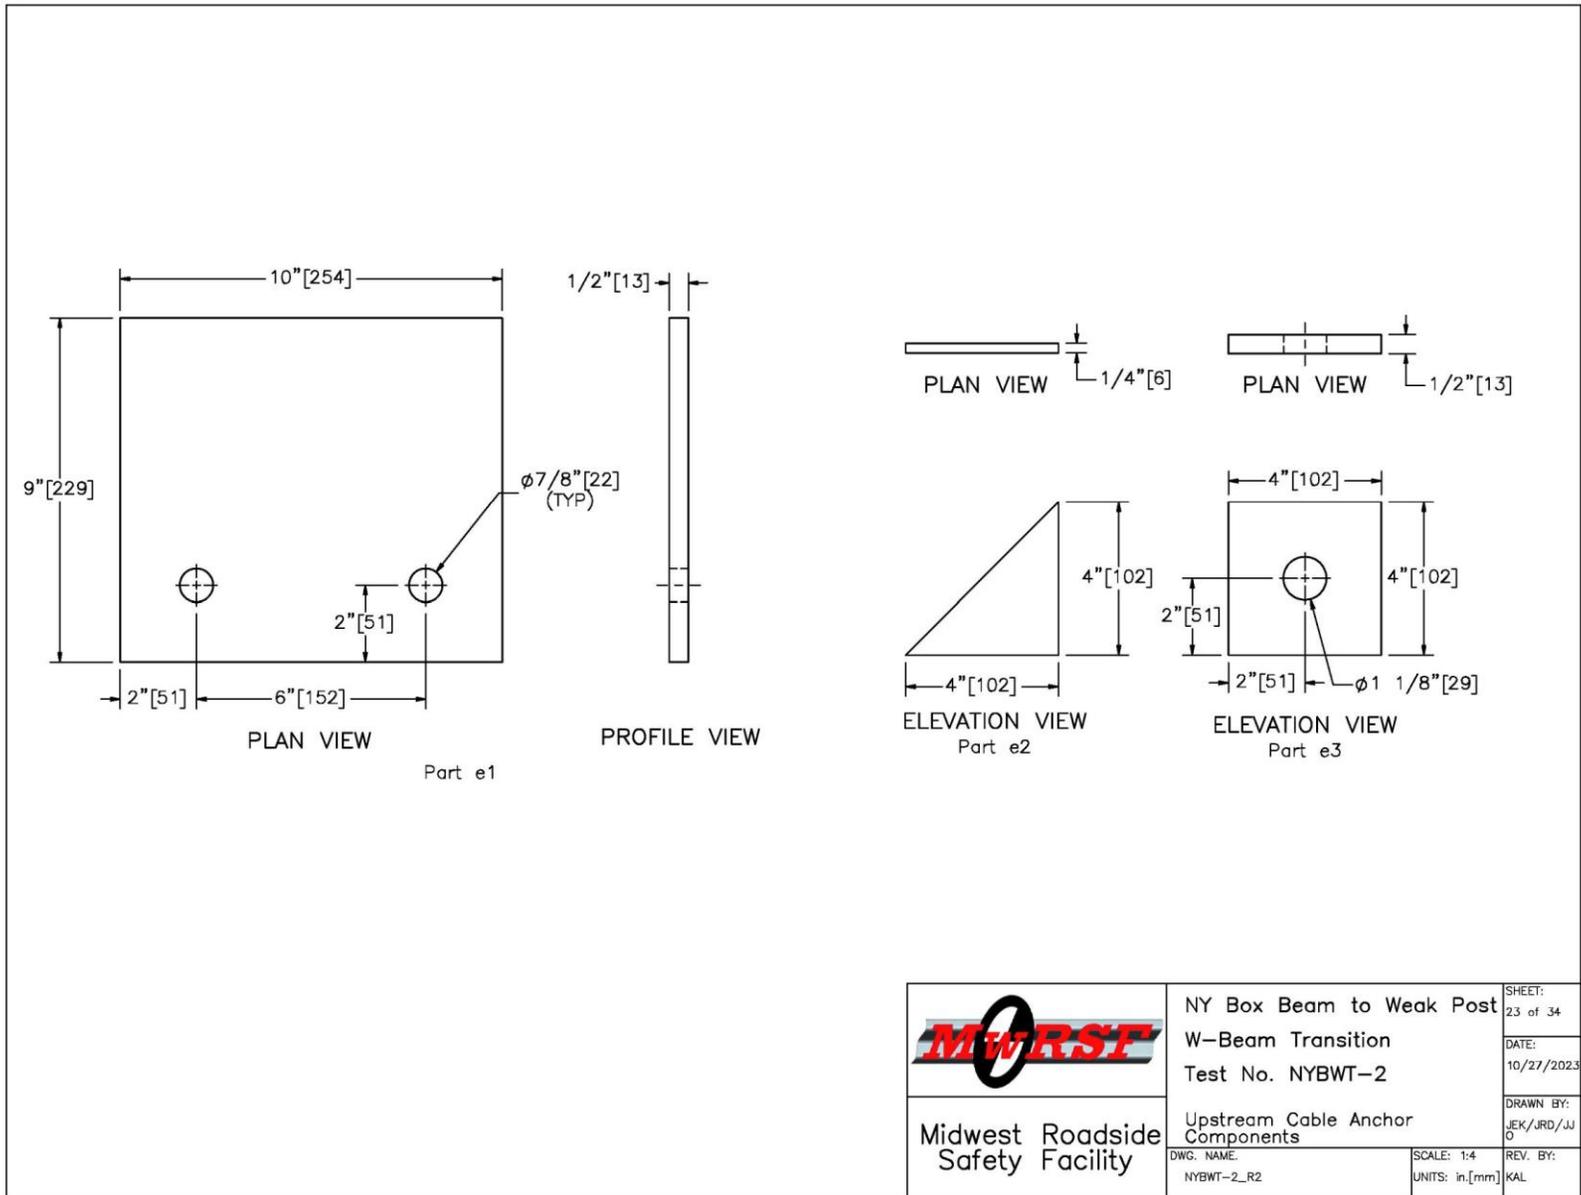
Upstream Cable Anchor Components, Test No. NYBWT-2
